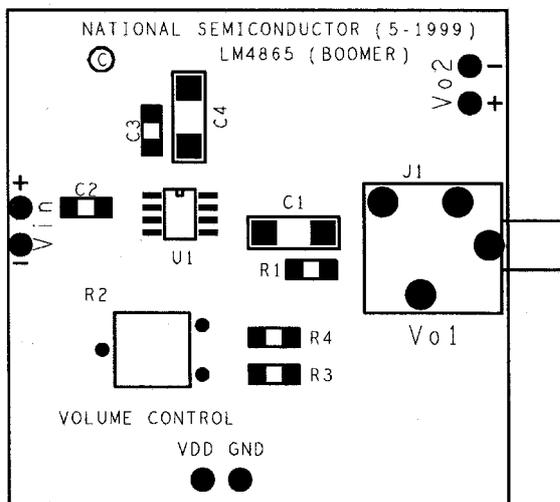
Recommended SO PC board layout: component side silkscreen
